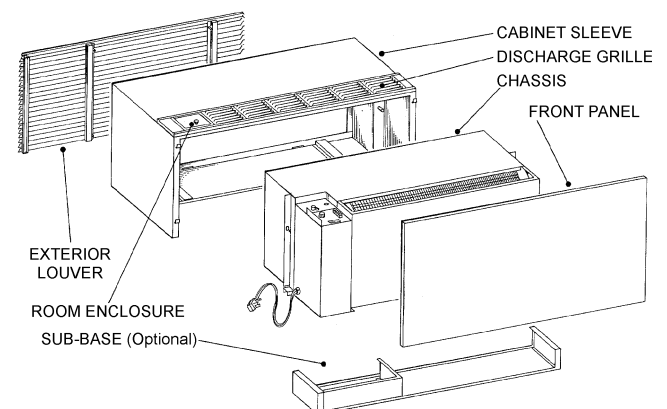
Packaged Terminal Air Conditioner with Combination Heating and Cooling Chassis
